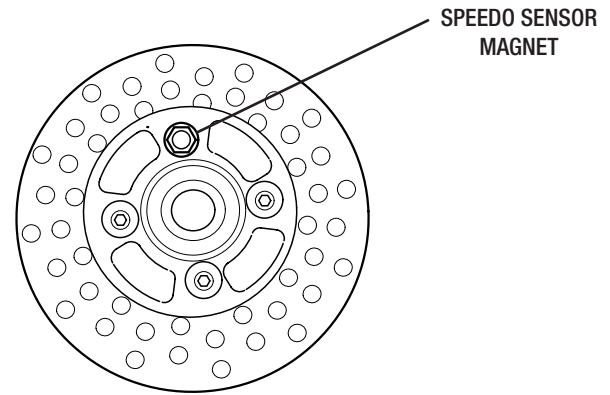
Magnet Mounting Using Existing Rotor Bolt
